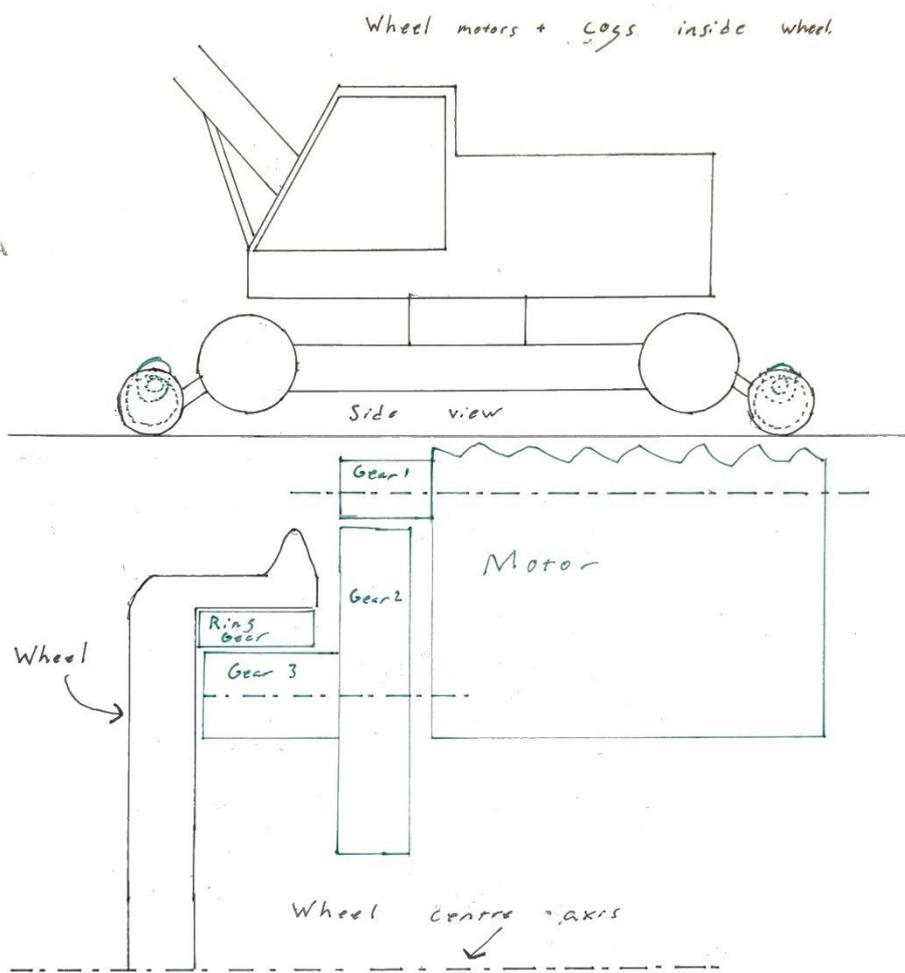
Concept “Wheel motor with ring gear in wheel”.
